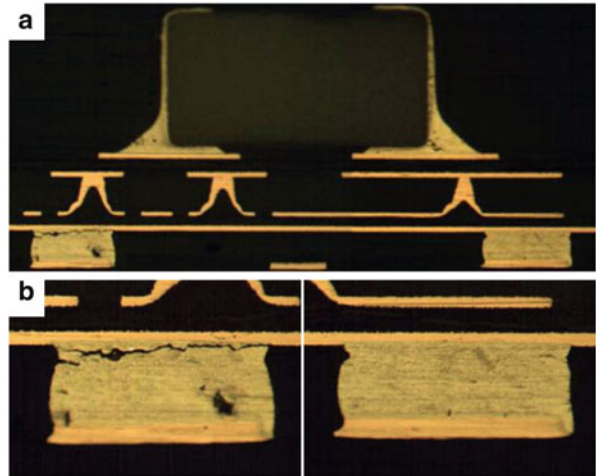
Cross sections of TMCL failed 2×3 daisy chain module: (a) overview showing the module/PCB solder joints, vias between copper layer 2 and 3, and solder joints between a passive and module; (b) closeup view of the blind vias connecting the chip to the module
